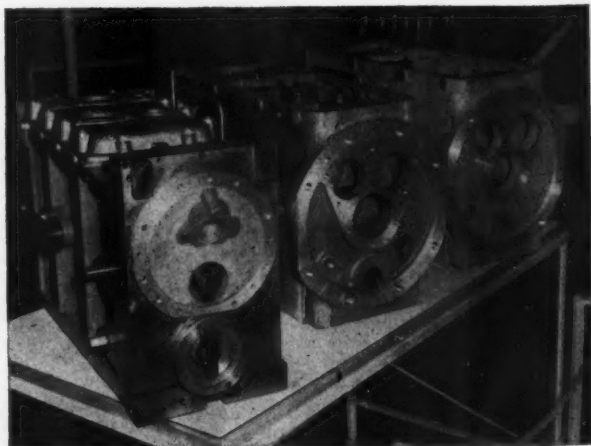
Two examples (right) of the aluminium castings drilled and tapped on the machine in Fig. 7 and 8, and one of the jigs employed to hold cover castings for the gearbox, which are drilled on the same machine
